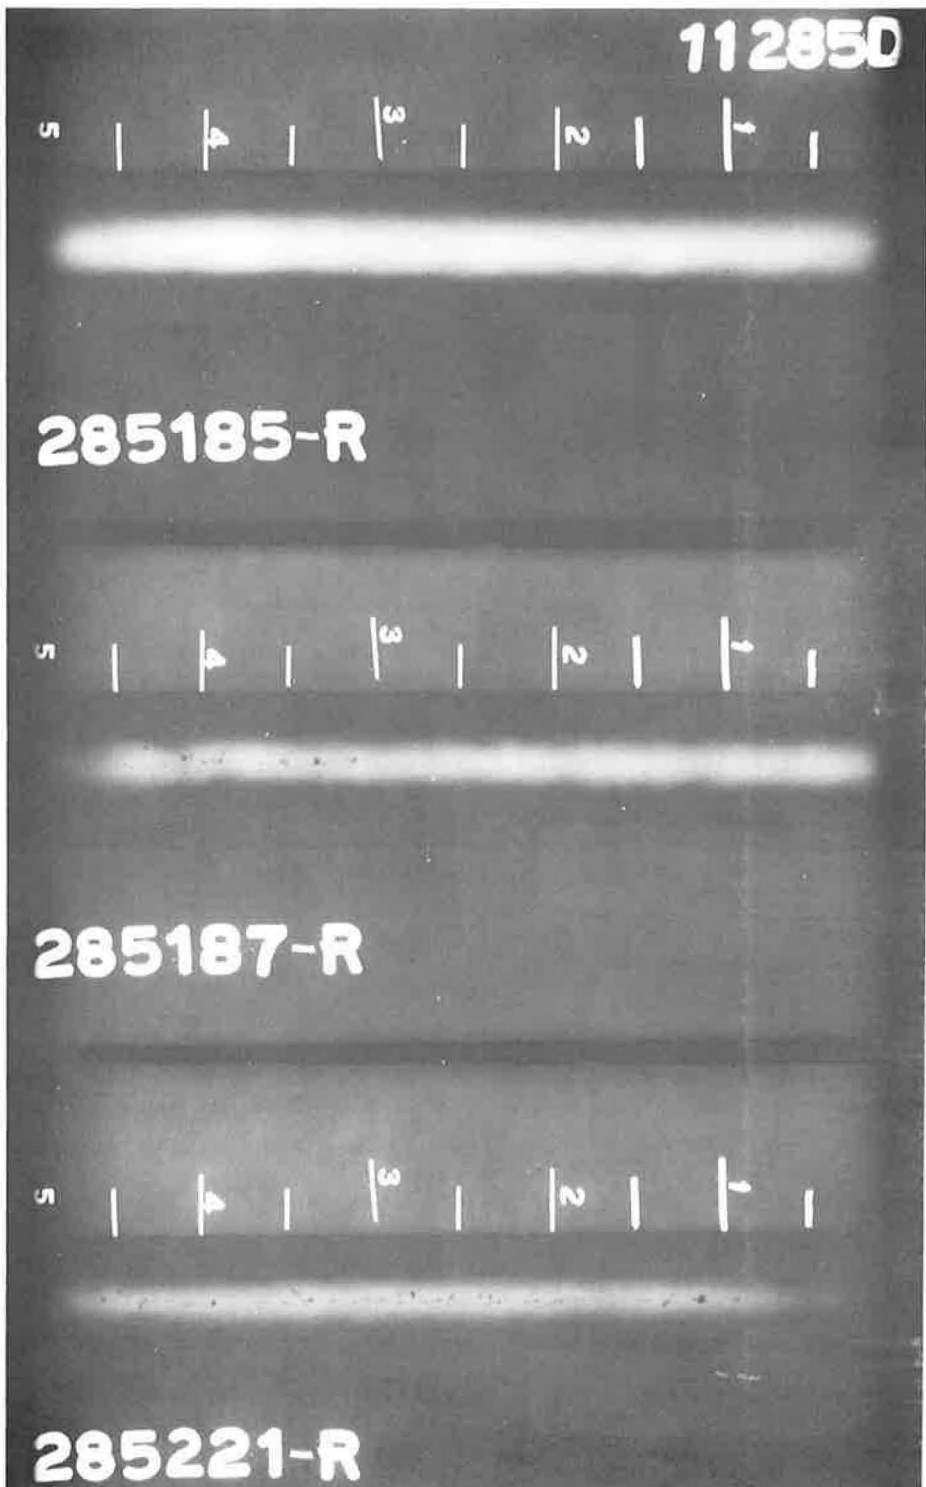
Radiographs of square butt welds in $\frac{1}{2}$ -in. 2219-T87 plate representing various degrees of penetration: S285185-R, complete with interpenetration of weld bead roots; S285187-R, moderately incomplete; and S285221-R, markedly incomplete.
